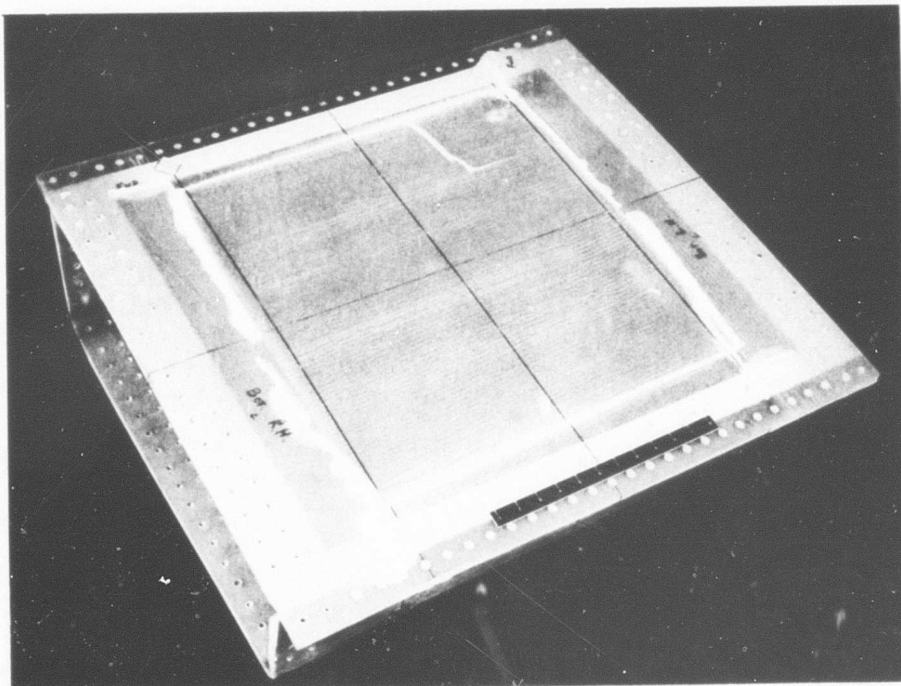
Failed Outside Lower Panel of the Bolted Torque Box.
